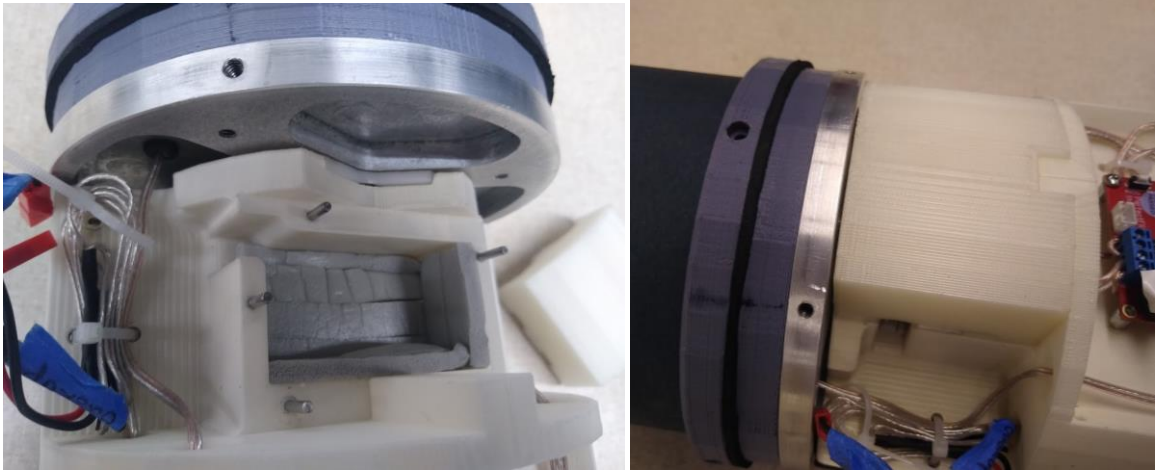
Battery cradle and wireway (left), and with cap installed (right). The curved top constrains the cap in place when the sled is installed in the coupler tube
